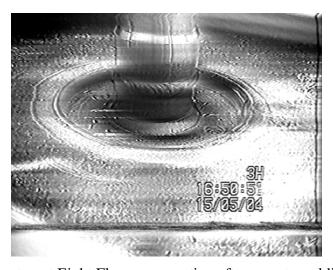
Compartment Eight Flange connection after remote welding operations.
